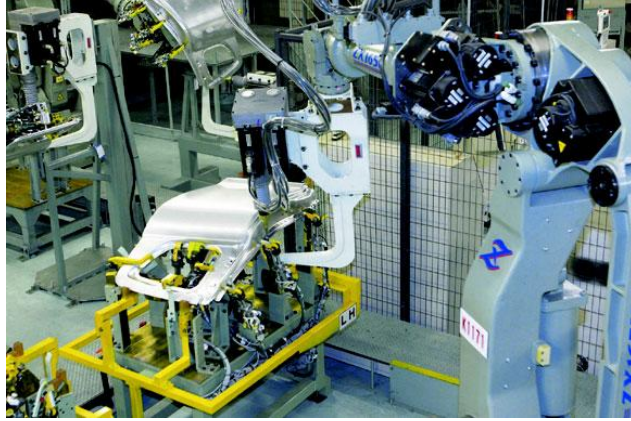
Weld being made by Mazda's new friction stir welder on body assembly [54].
